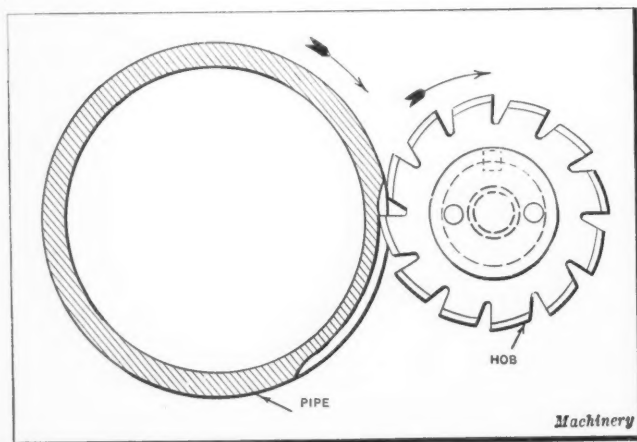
Diagram illustrating Action of Thread-milling Hob
